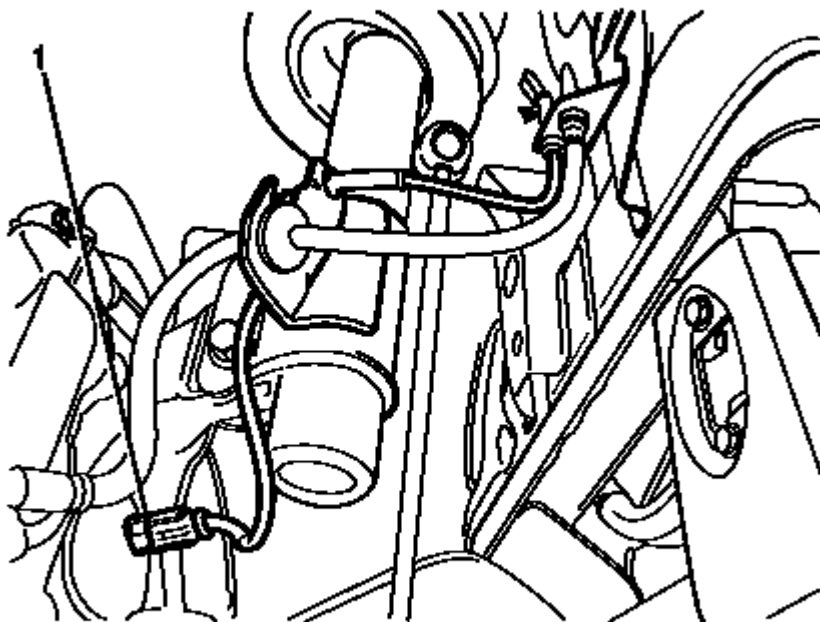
Identifying Intermediate Steering Shaft To Pinion Shaft Retaining Bolt
